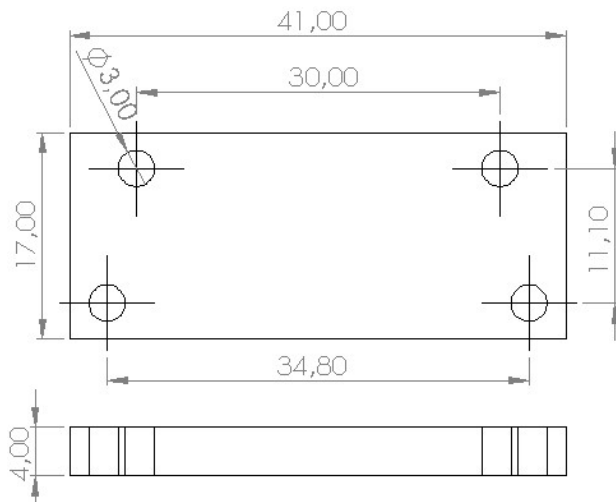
Technical drawing of the 3D-printed lid used to apply pressure on the gasket.
